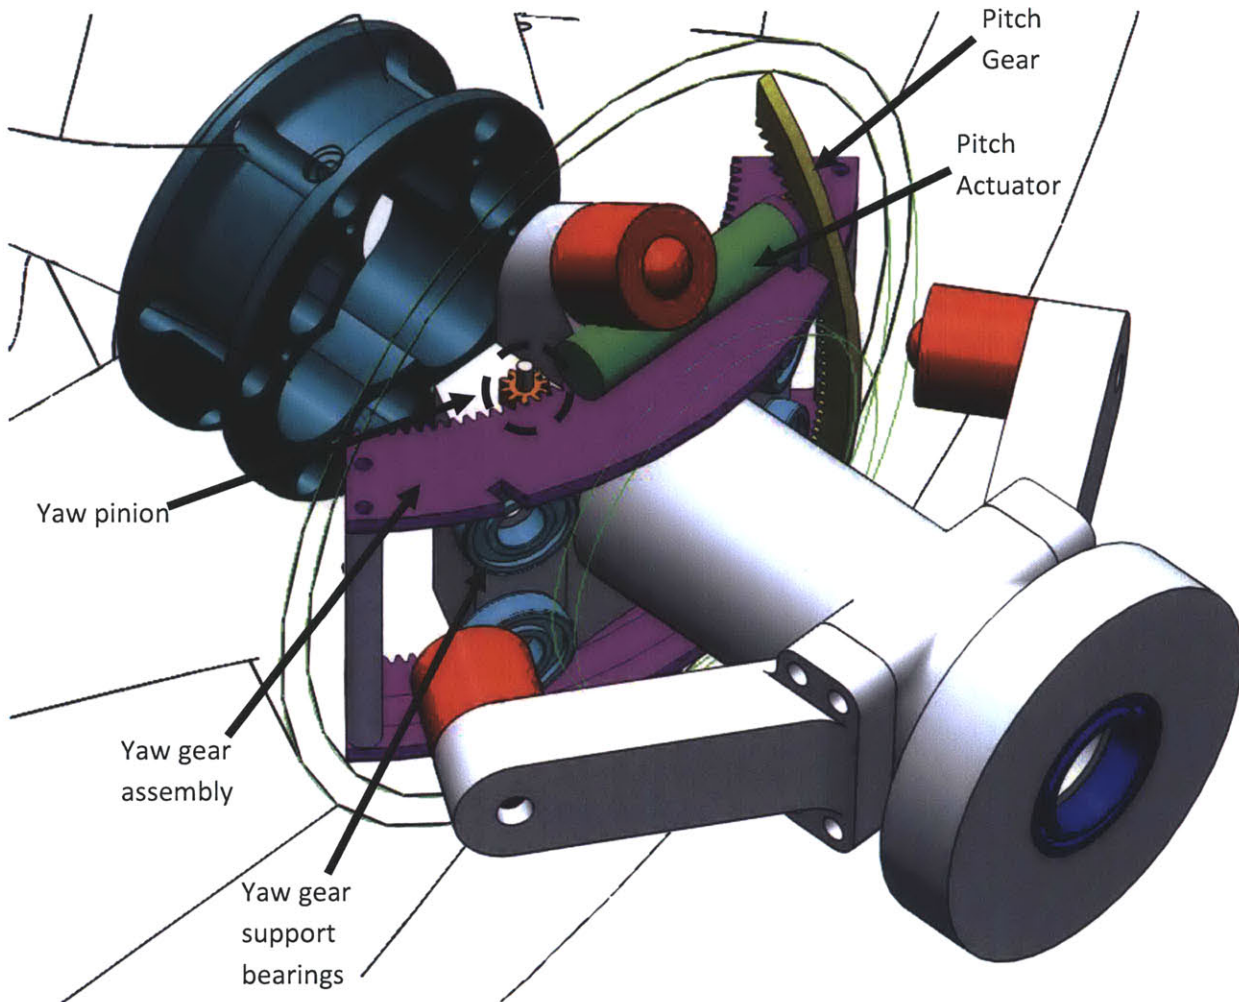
A view of the spherical floating pivot drive system. Note that there is adequate clearance between the yaw gear support bearings and the pitch gear, as well as the inner ball transfer and the pitch actuator. The pitch gear and propeller bearings, as well as the drive shaft and propulsion motor are not shown here.
